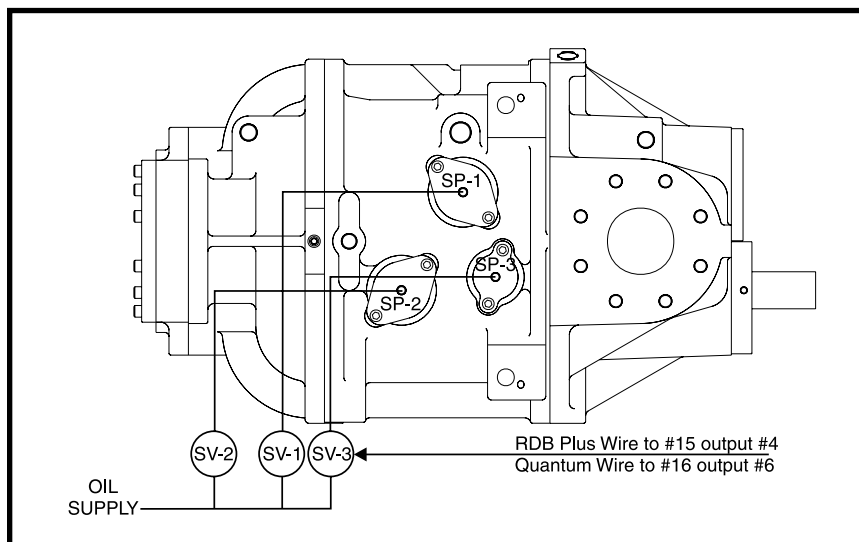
TDSL 283S/283L 4-Step P & I Diagram with 4-Step Machine (bottom view)
